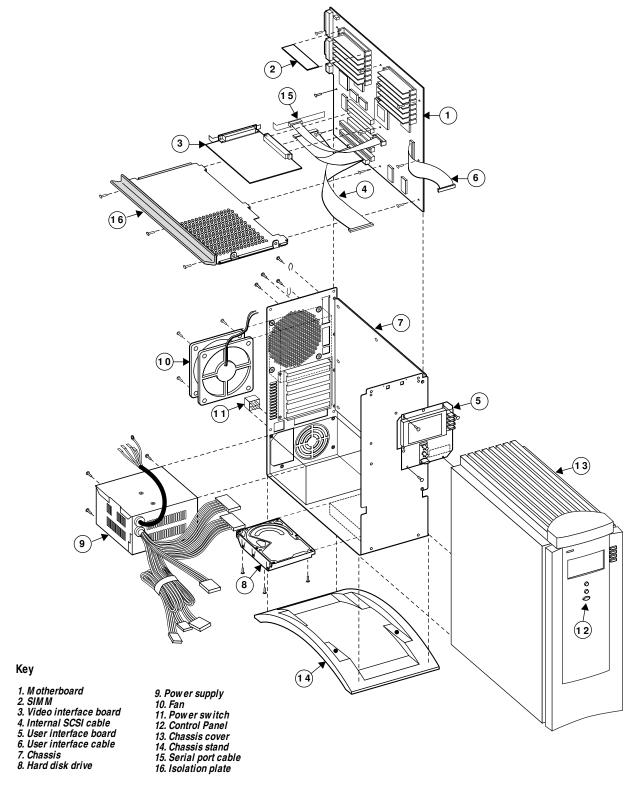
Exploded view of Fiery XJ-R/R2 components
